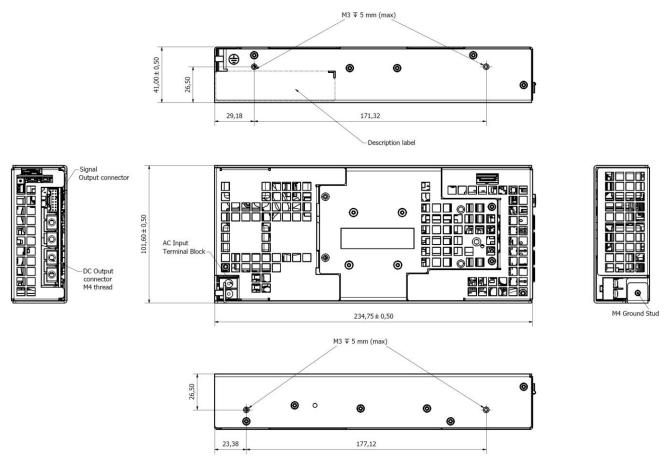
Mechanical Drawing - MBC1200-1T24-PCF Model
